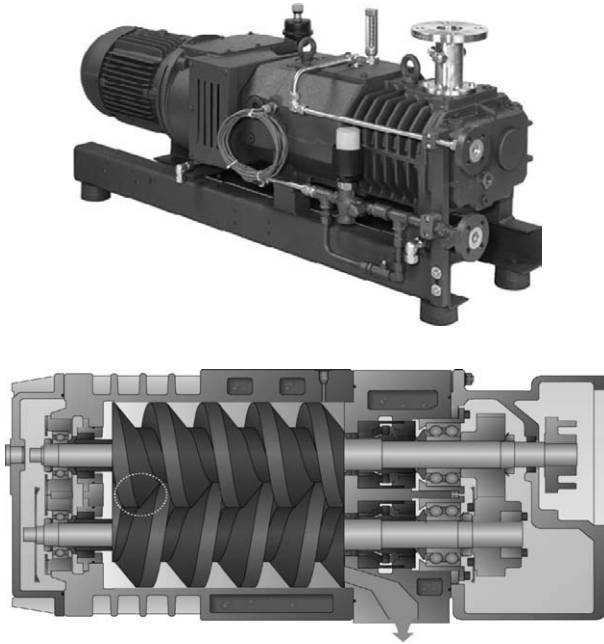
Photo and cross section of a screw-type dry vacuum pump
